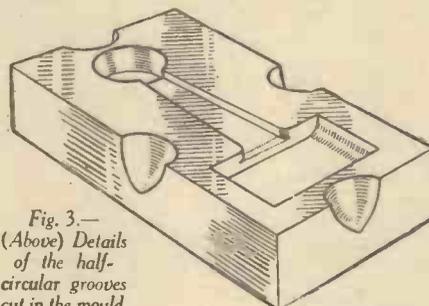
(Above) Details of the half-circular grooves cut in the mould
